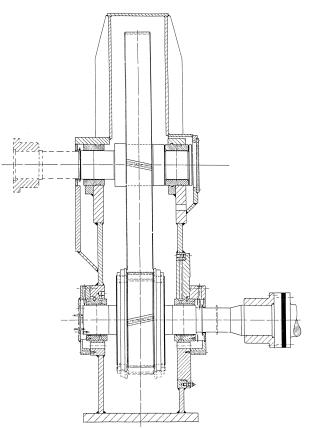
Gear Casing for IGTMs with Plug Shaft Drive.
